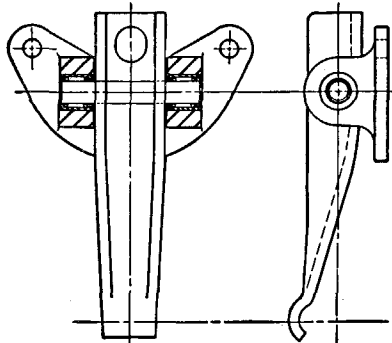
The Needle Bearings in the fingers of an automobile clutch are packed with grease before assembly. No additional lubrication is needed.
